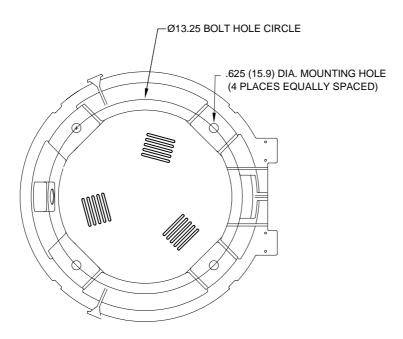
Power Converter (PC 310-7 & PC 310-7B) Mounting and Outline
